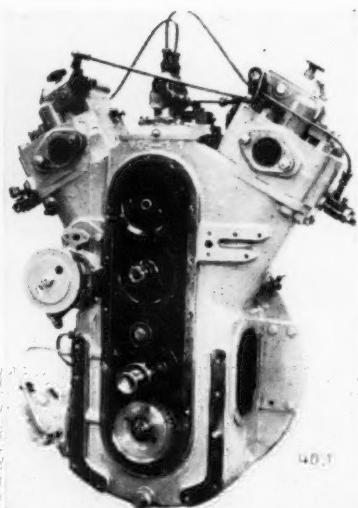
Front view of Orenstein-Koppel and Lübeck V engine showing auxiliary-drive gear train
